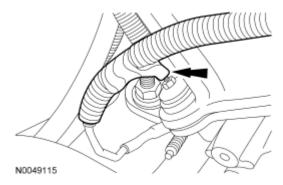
Generator Battery Cable Retainer Courtesy of FORD MOTOR CO.
